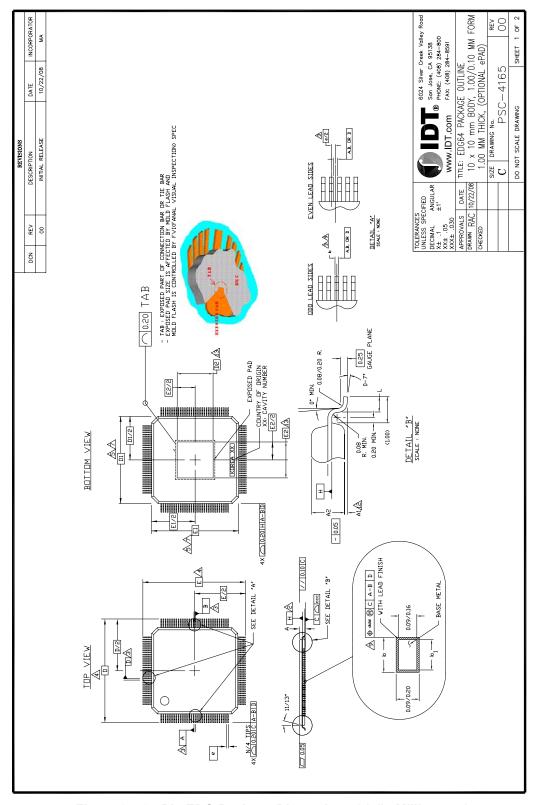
64-Pin EDG Package Dimensions (a) (in Millimeters)
